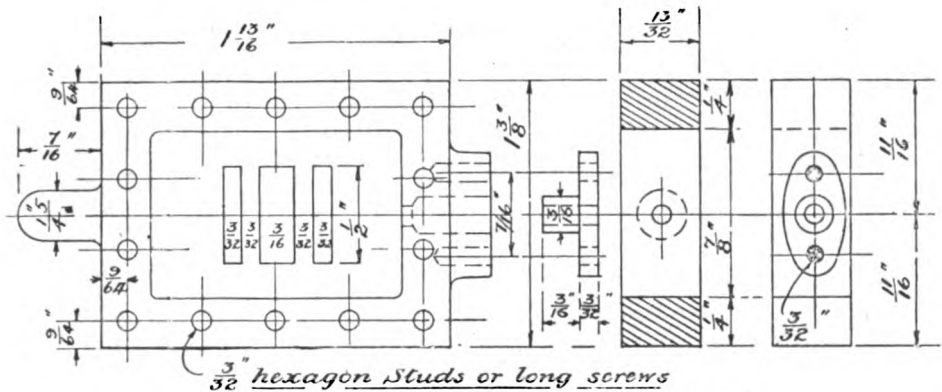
LOW-PRESSURE STEAM CHEST AND PORTS.
